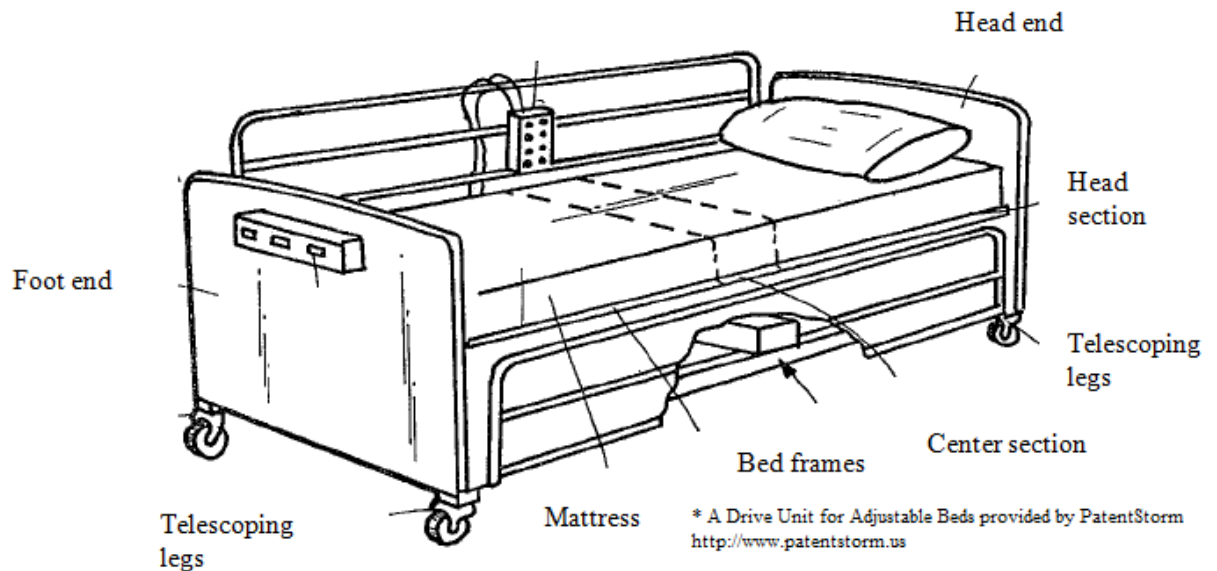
Perspective View of a Drive Unit for Adjustable Bed.
